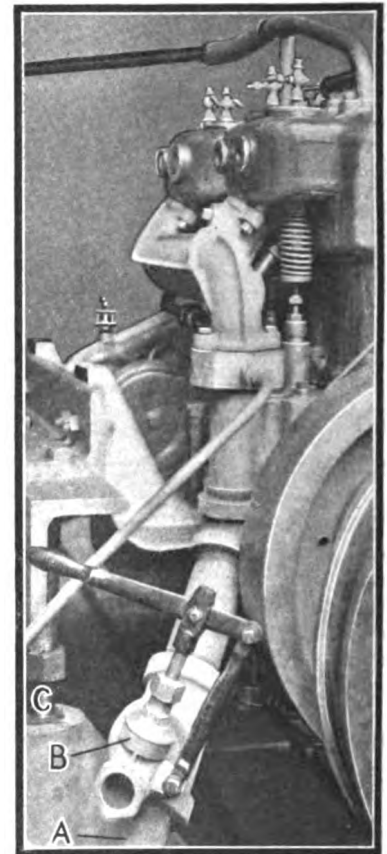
Exhaust pipe A leading to flue with branch attachment B for taking samples of the exhaust gases. To the left one of the jackscrews C of the supports for adjusting the height of angle irons
